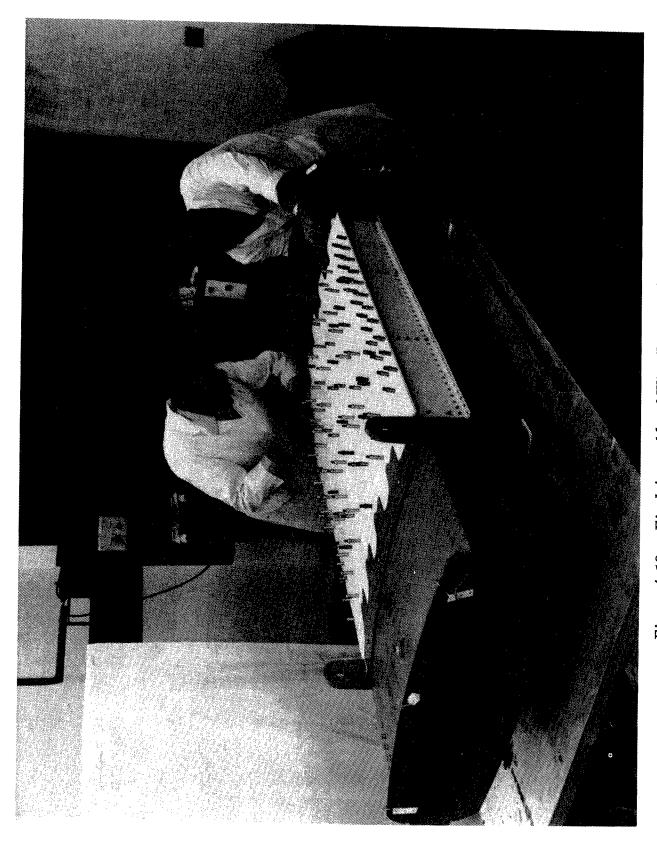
Final Assembly of Wing Box Installing Skin Fasteners.
